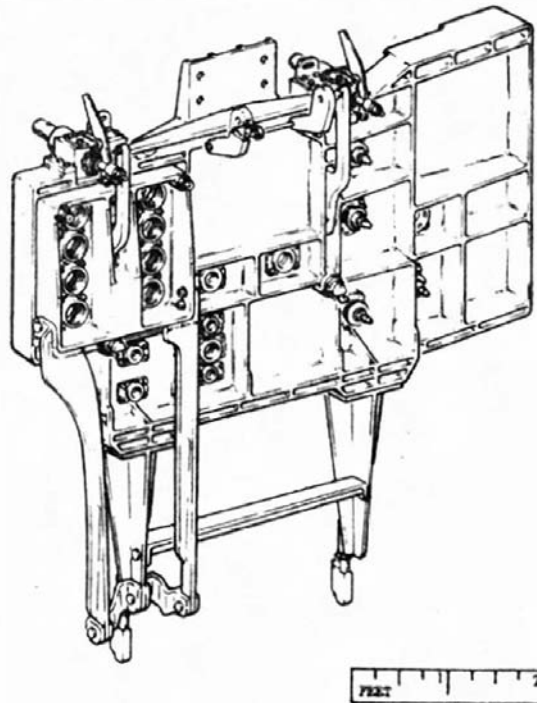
Umbilical Disconnect Arm 4 Carrier Plate Assembly (A7-42)
